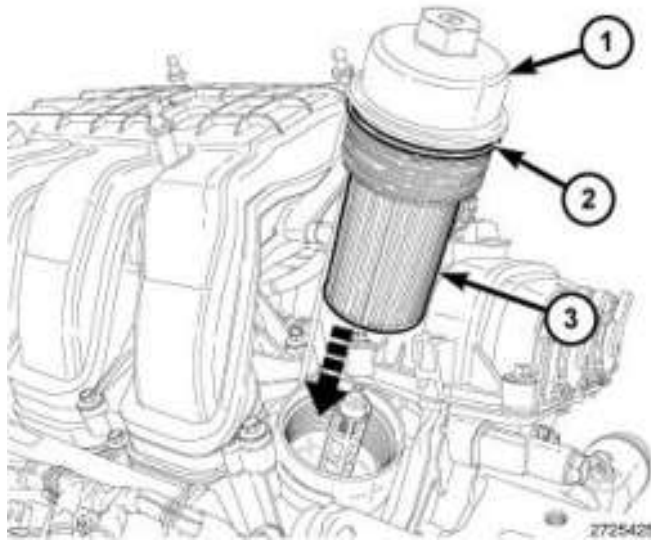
Oil Filter Cap, O-Ring Seal & Oil Filter
